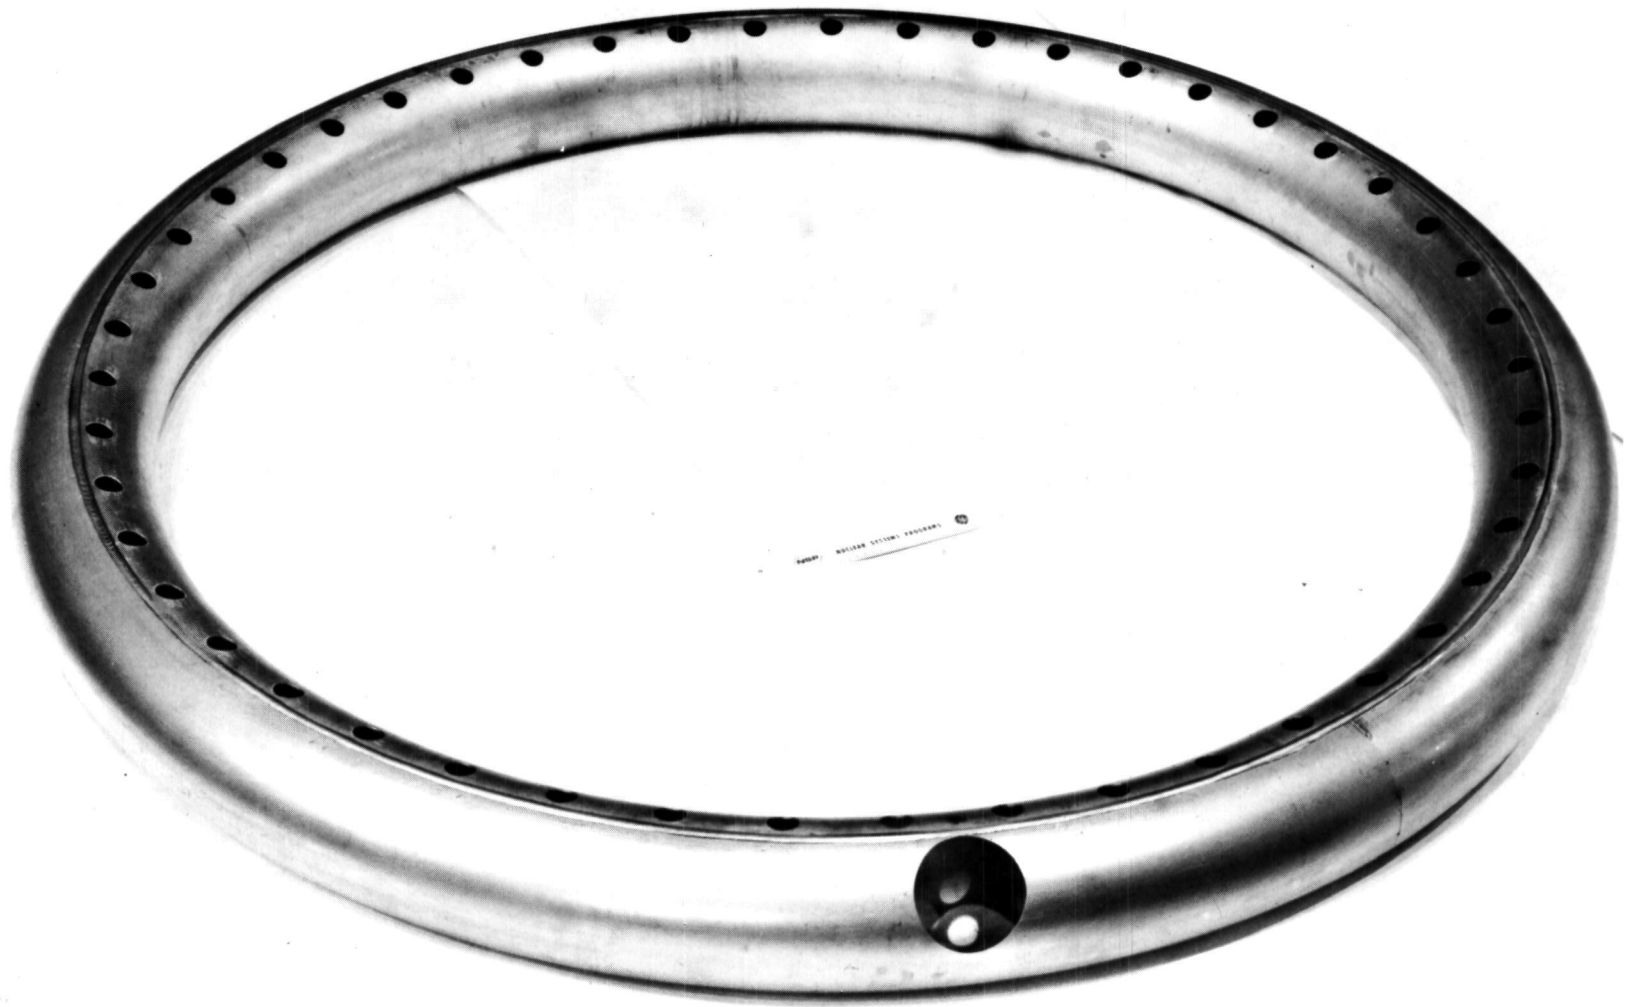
Inlet Manifold After Machining of 48 Boss Holes and Nozzle Opening.
